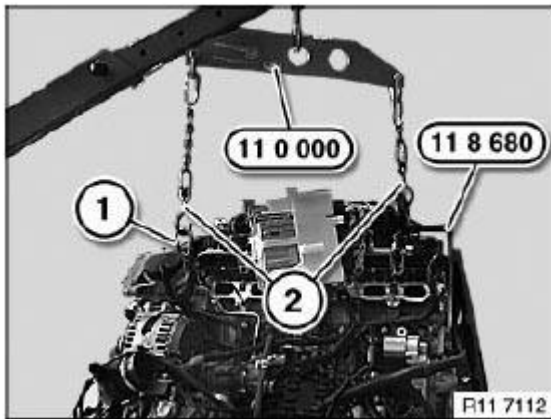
Identifying Special Tools 11 0 000 And 11 8 680
